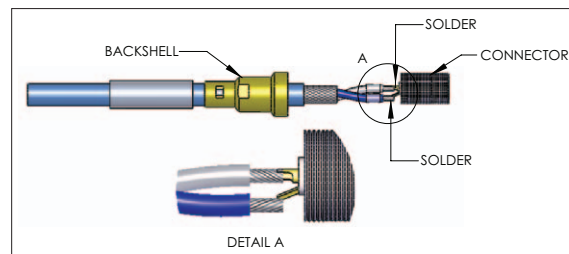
Figure C. Solder white wire on to center conductor. Solder blue wire onto inner shield contact.
